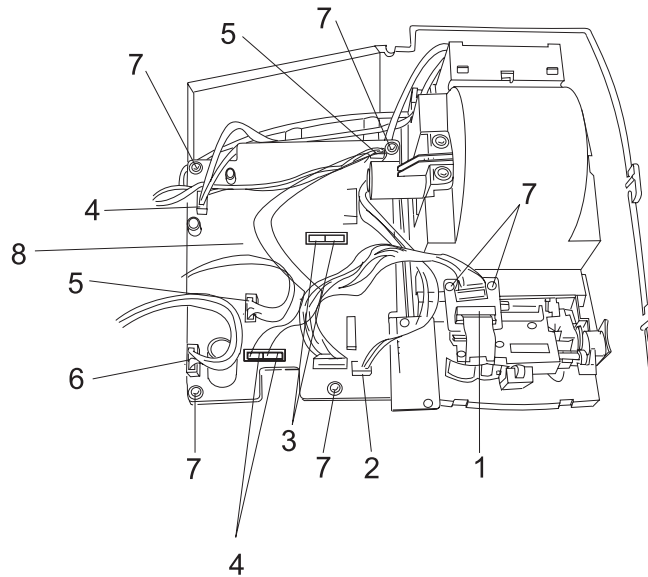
Main Board and Display Disassembly/Reassembly
